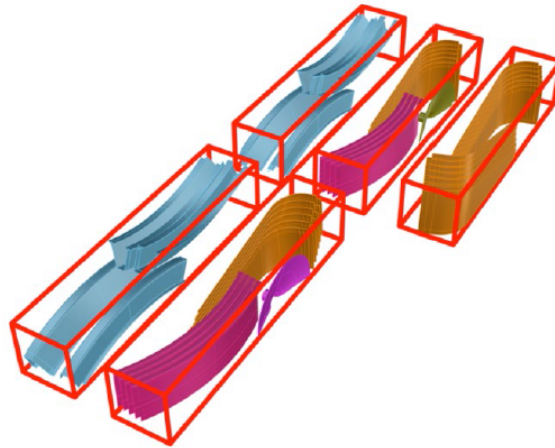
Isometric and Exploded Viewing from the design of the previous report
